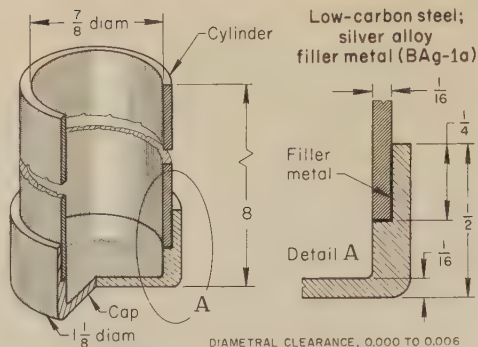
Cylinder-cap assembly that was torch brazed because quantity to be brazed was low (Example 584)
